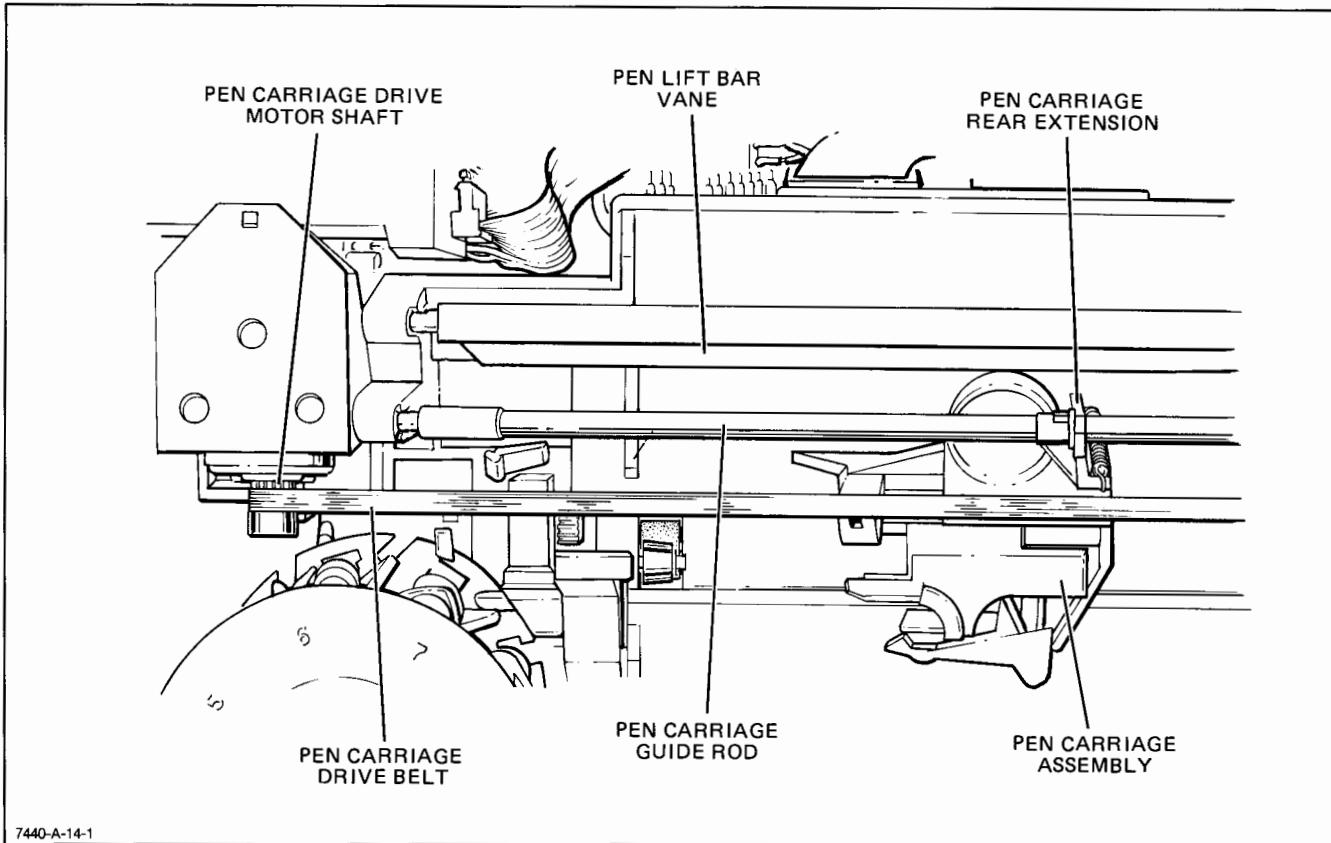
Pen Carriage Assembly Removal, Detail B
